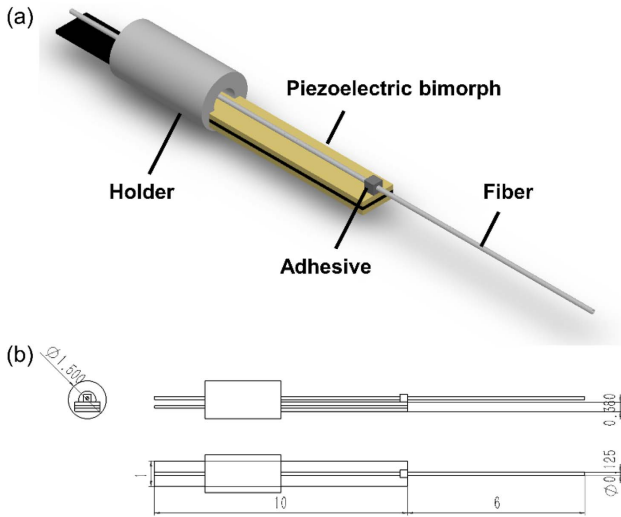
3D model and the engineering drawing of the fiber scanner assembly. (a) 3D model of the fiber scanner assembly. (b) Engineering drawing with dimensions.
